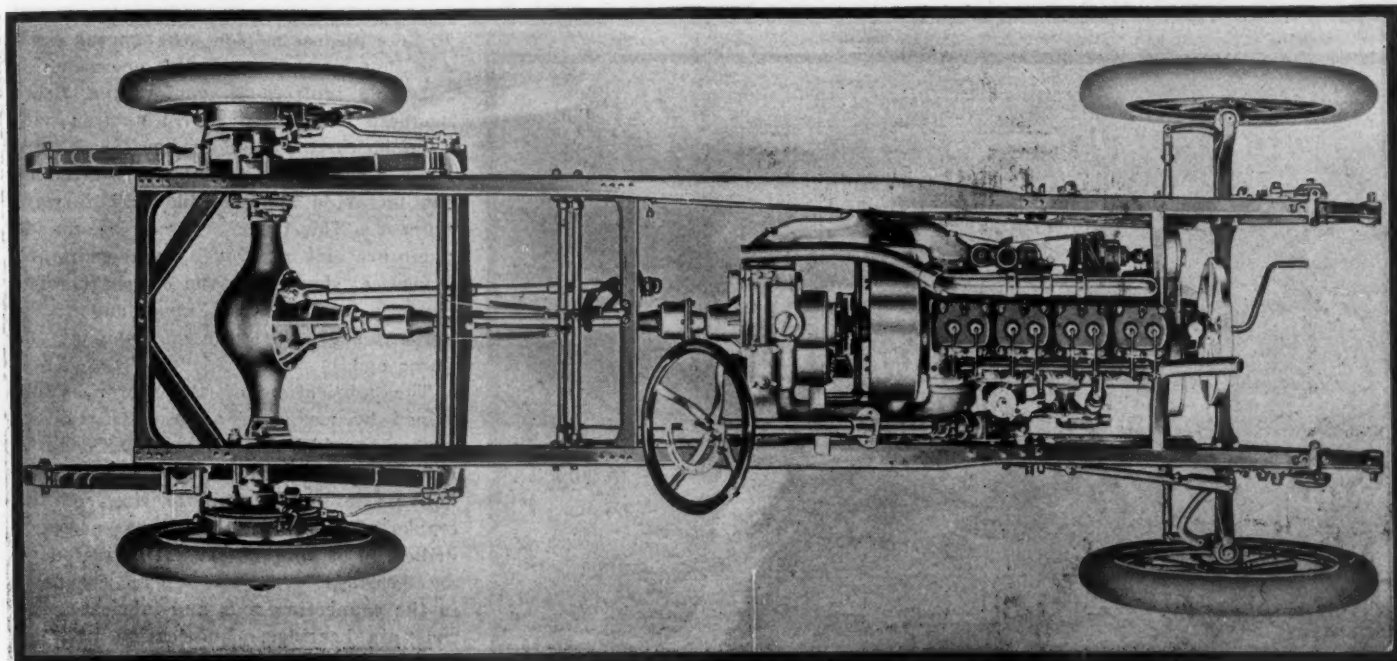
CHASSIS OF KNOX 1912 MODELS R AND R-45 SHOWING UNIT POWER PLANT AND THREE-POINT SUSPENSION
